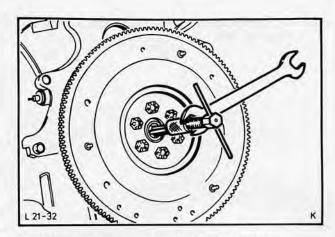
Remove pilot bearing with Special Tool No. 21–036
